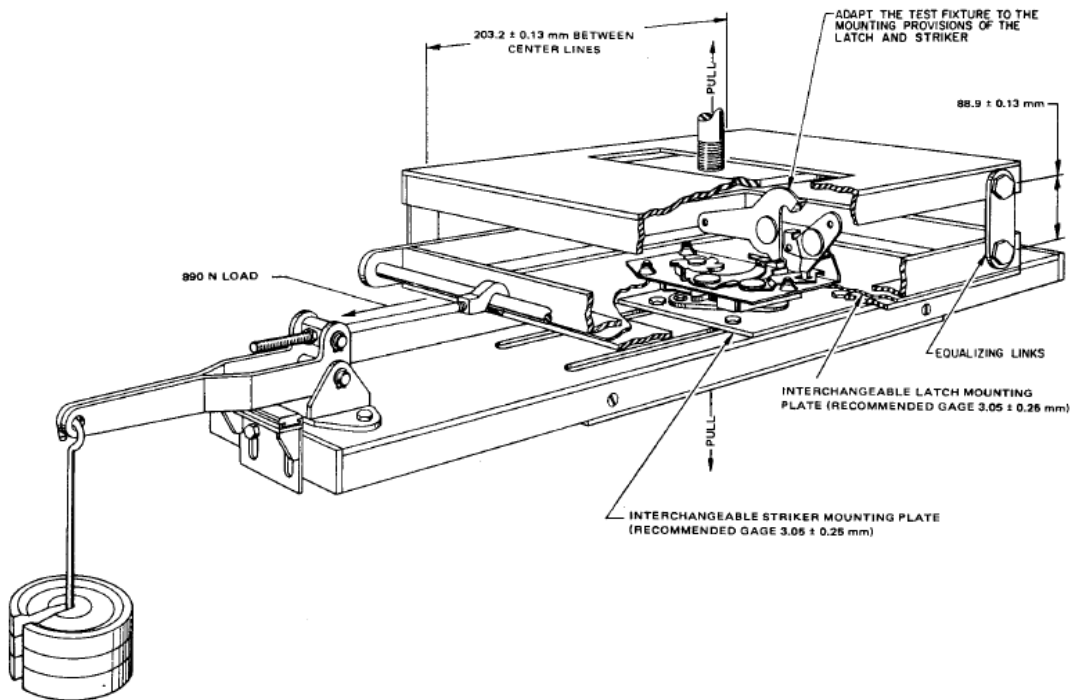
DOOR LATCH—STATIC LOAD TEST FIXTURE (LONGITUDINAL LOAD)
